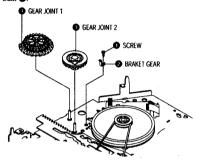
Bracket Gear, Gear Joint 1,2 Removal
